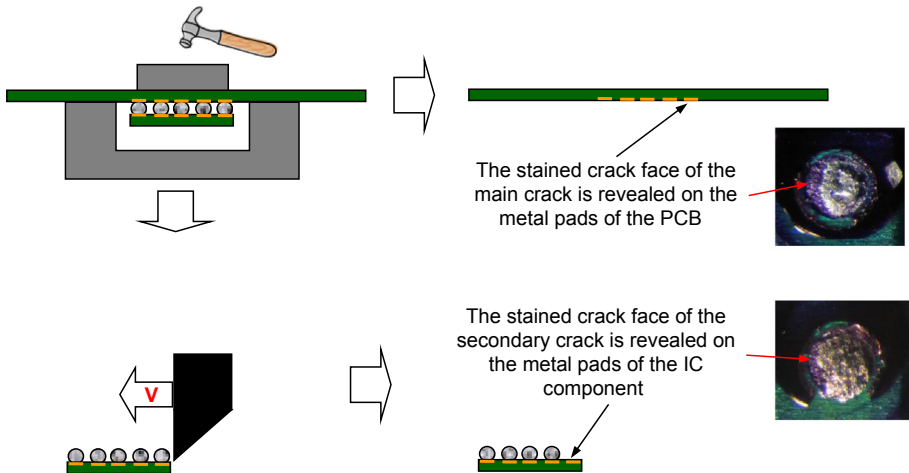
Dislodging of the IC component from the PCB by impact hammering and the solder joint from ICC component by impact shearing.
